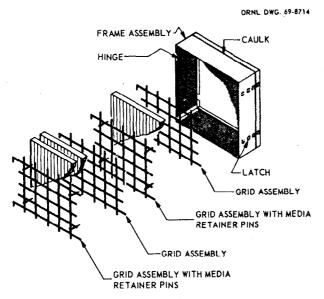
Exploded view of typical cell assembly for demister shown in Fig. 3.17.
